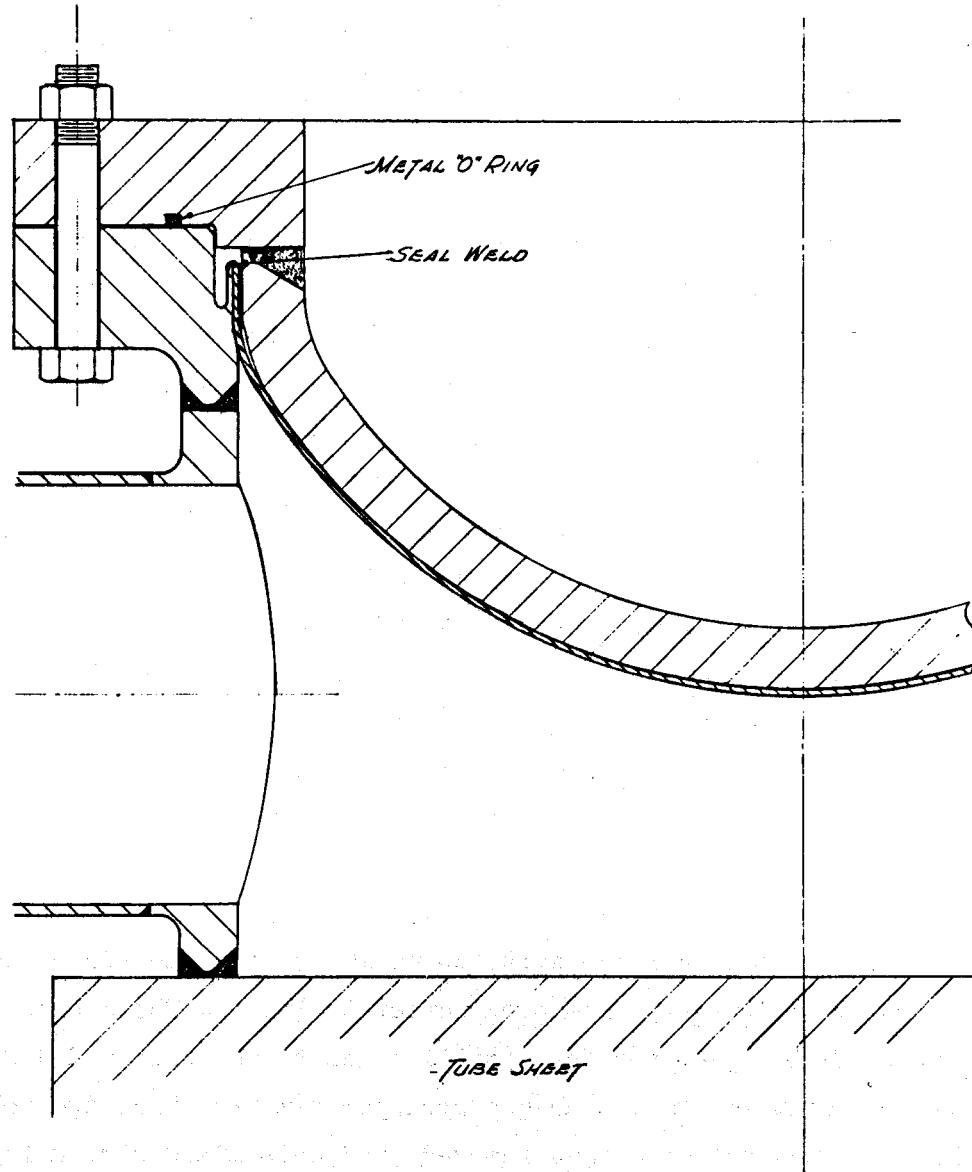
Primary Heat Exchanger Head Closure Detail.
